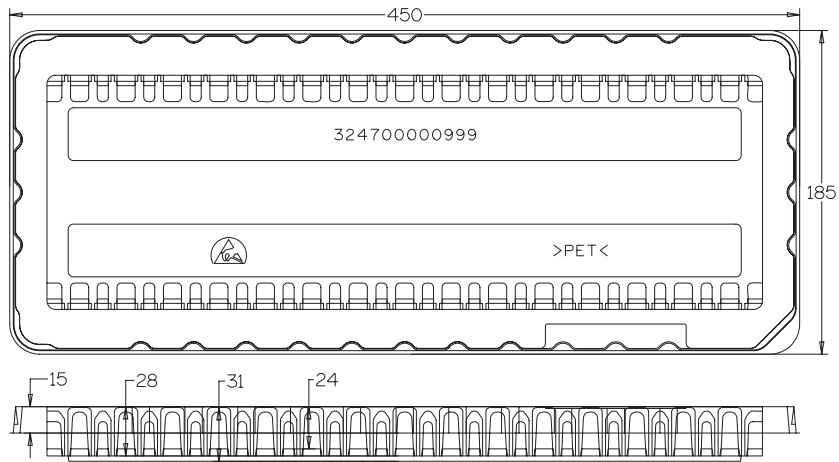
Tray dimensions for L2M0-xxxx003MC3300.
